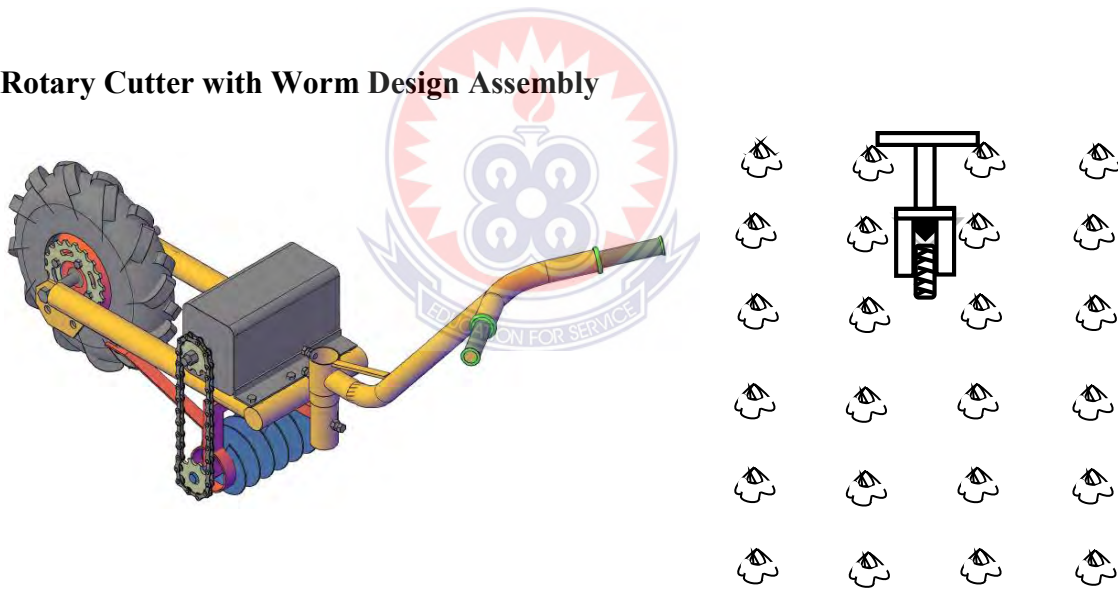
The Cultivator with Rotary Cutter with Worm Design Assembly
